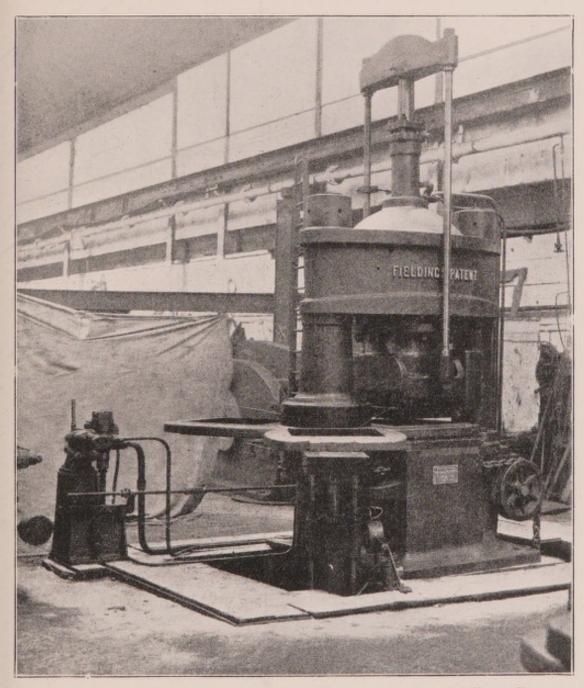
FIELDING & PLATT'S THREE MOULD HYDRAULIC FLAG PRESS.
